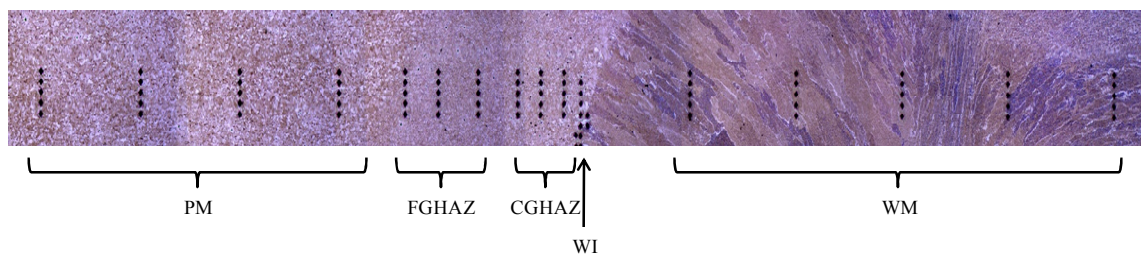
Locations of hardness measurements on the weldment.
